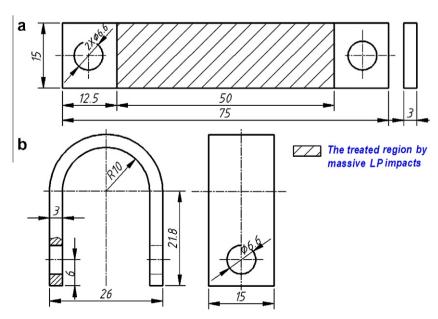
Dimensions of (a) the steel plate and (b) the U-bend sample (unit: mm).
